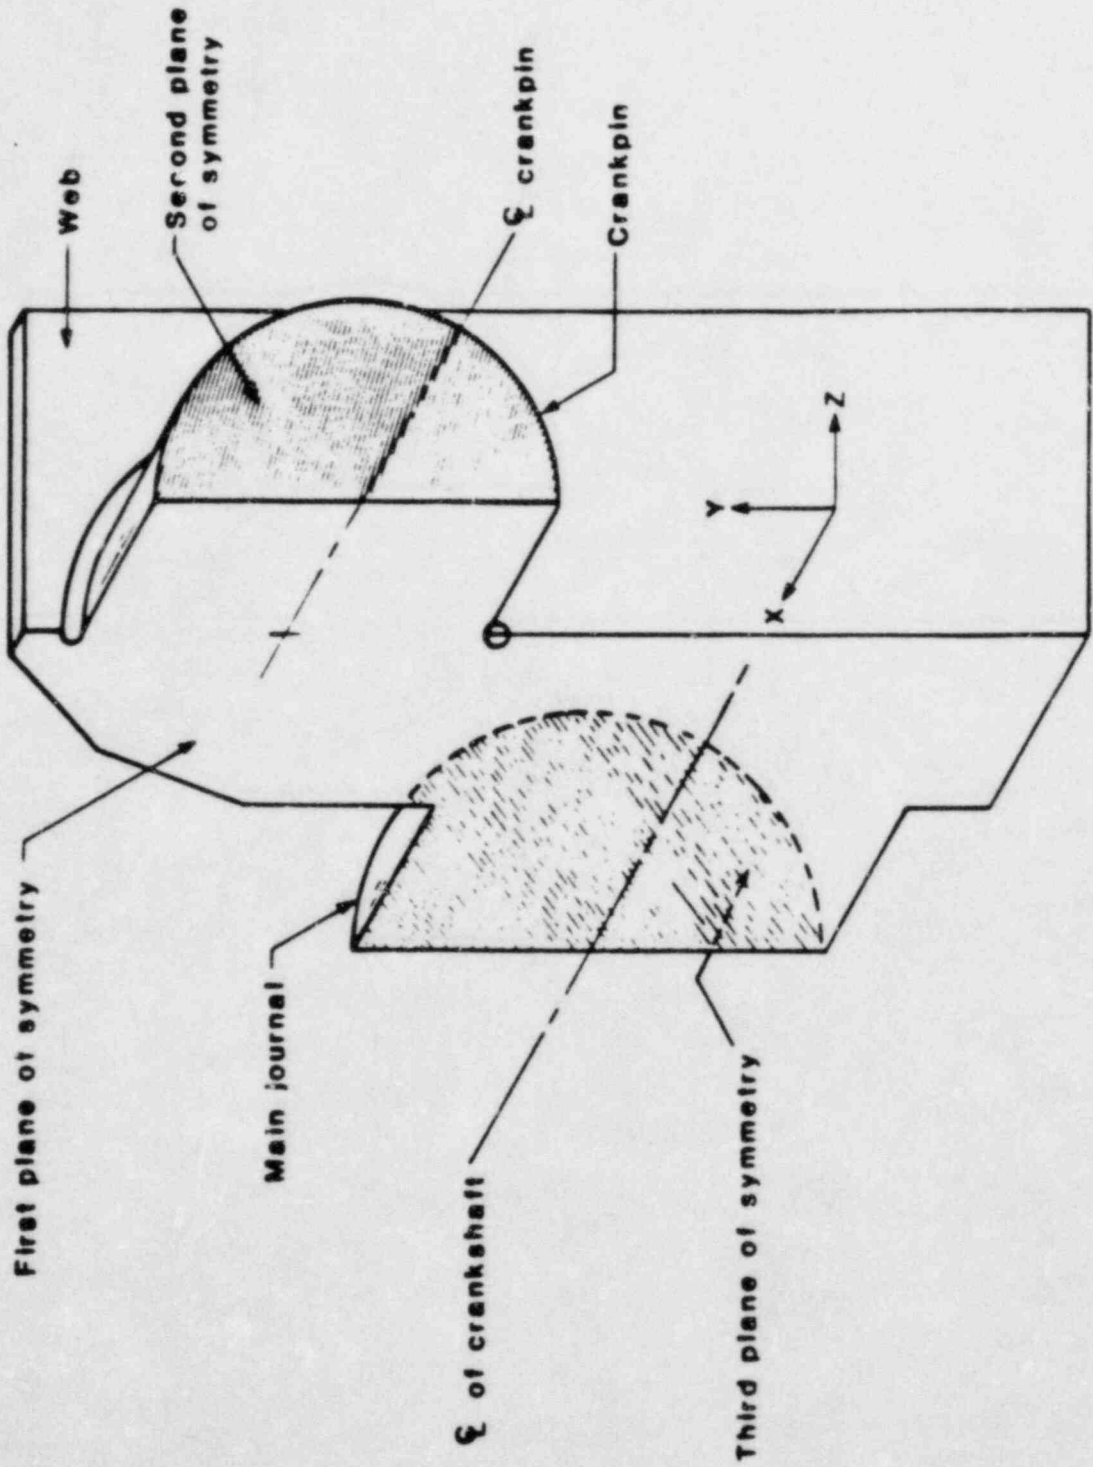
Typical section of the crankshaft showing coordinate axes and planes of symmetry.
